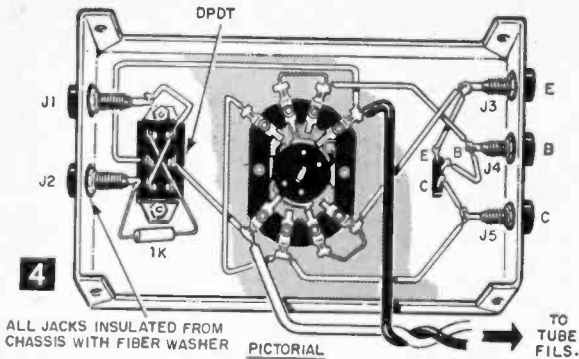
Tube filament checking sockets are optional. Wire your chassis connections with solid hookup wire, and use flexible wire for the tube socket connections.
